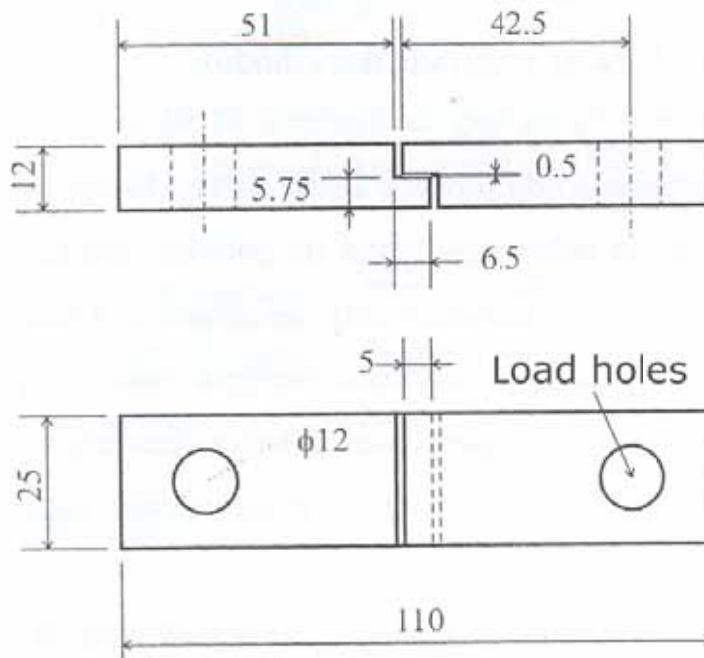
TAST SPECIMEN (DIMENSIONS IN MM)
